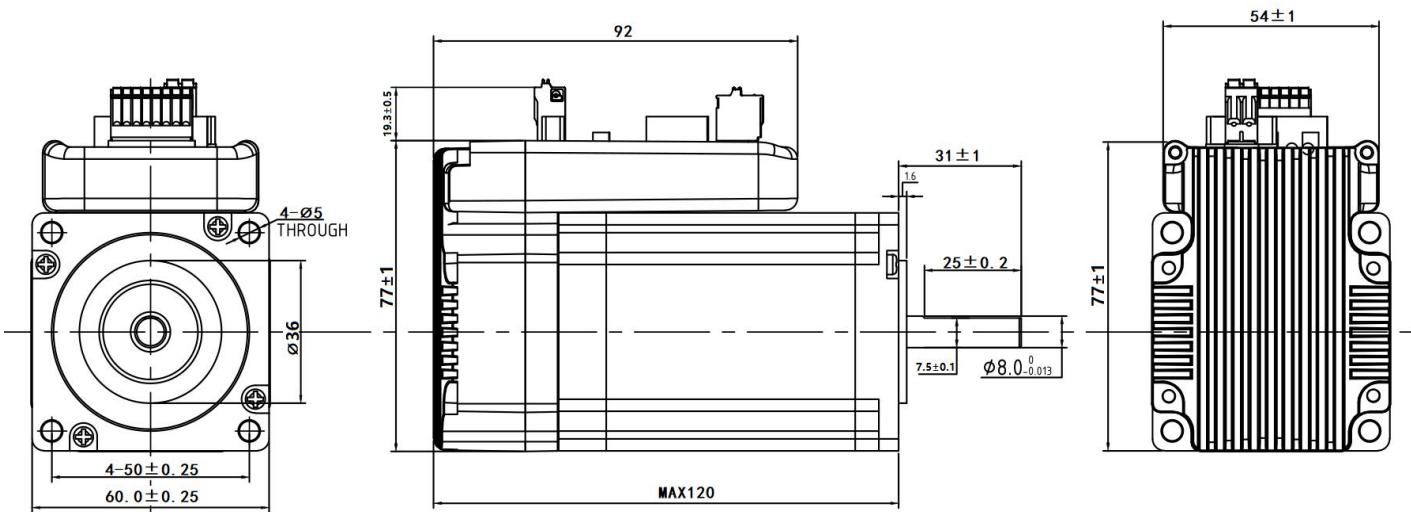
JMC IHSS60-EC Mechanical installation dimensions of integrated motor (Unit: mm)
